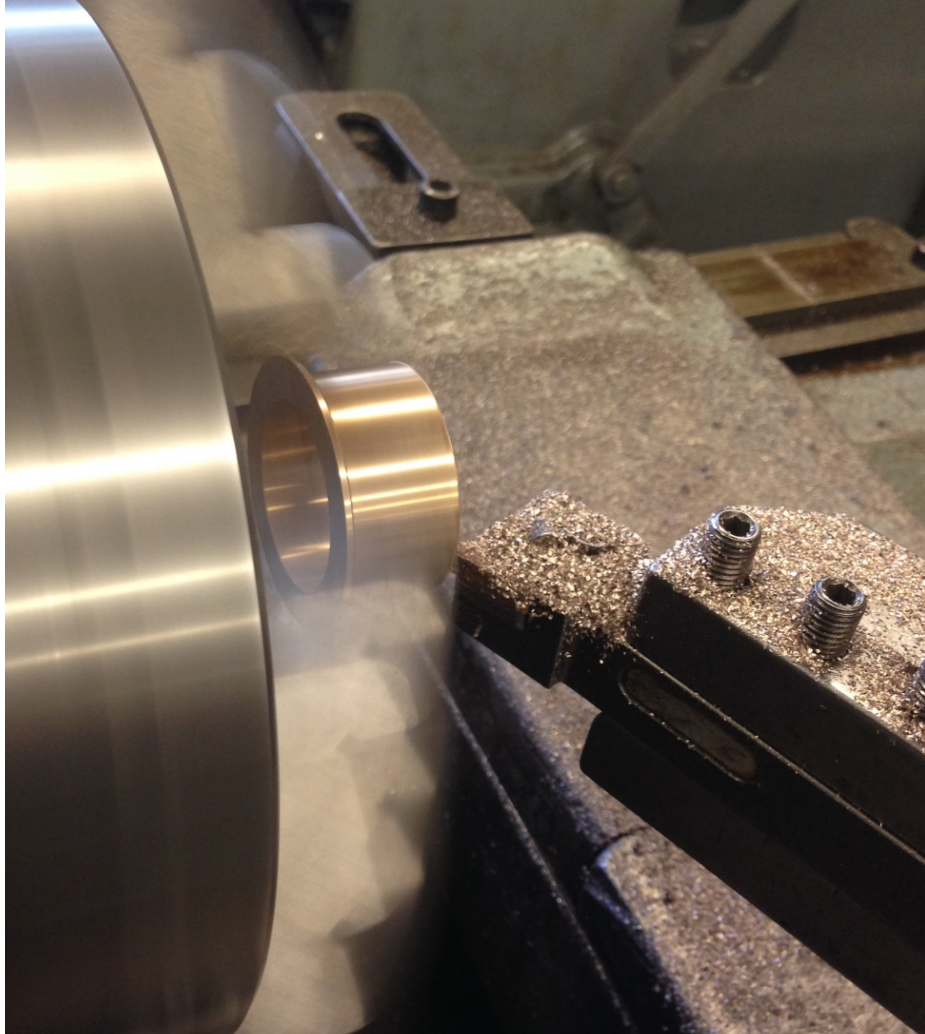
MACHINING OF OIL-LITE BUSHING
